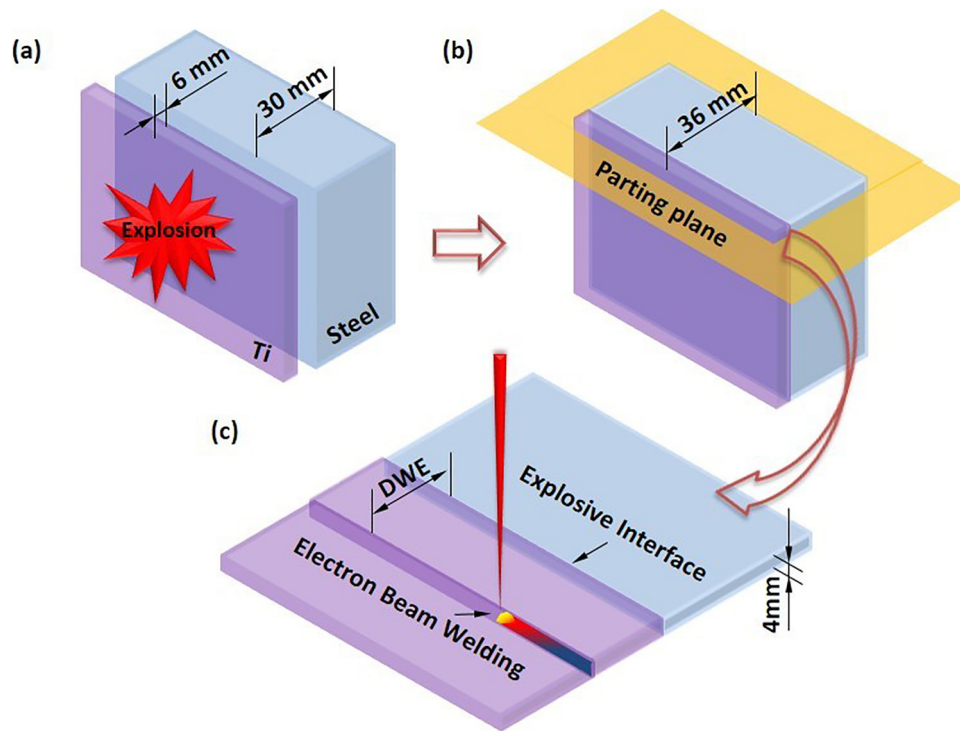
Schematic diagram of welding process with hybrid electron beam-explosive welding joint. (a- Formation of the explosive welding joint, b- Fabrication of the Ti-steel composite plate as transition joint, c- Formation of the hybrid electron beam-explosive welding joint.).
